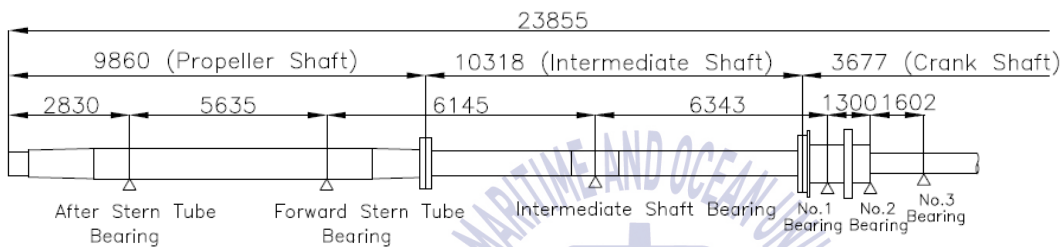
Shaft alignment system on 300,000 DWT oil tanker
